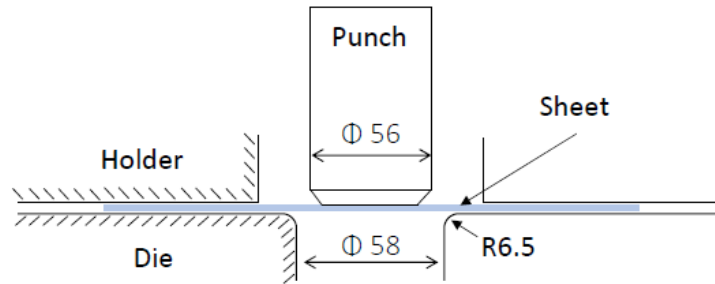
Tool geometries for circular cup drawing test (dimensions in mm)
